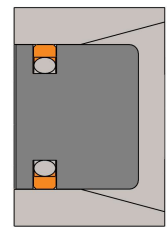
Force resizing sleeve over PTFE seal. Seal is ready for use
